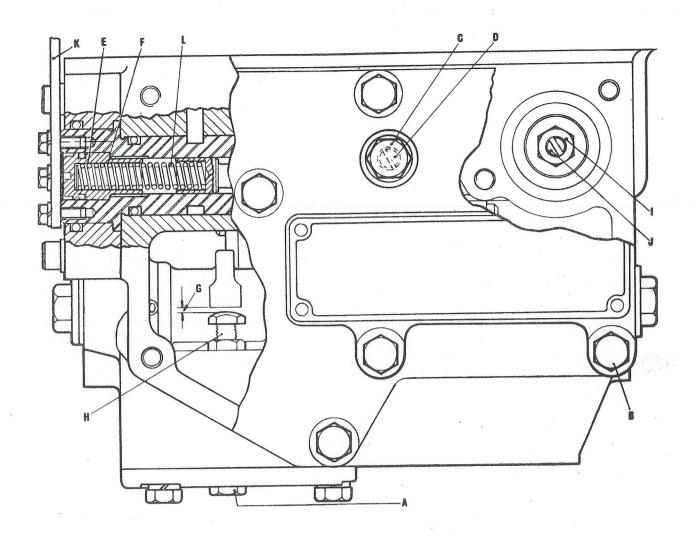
LISTER REVERSE GEAR—Hydraulic Operated.
